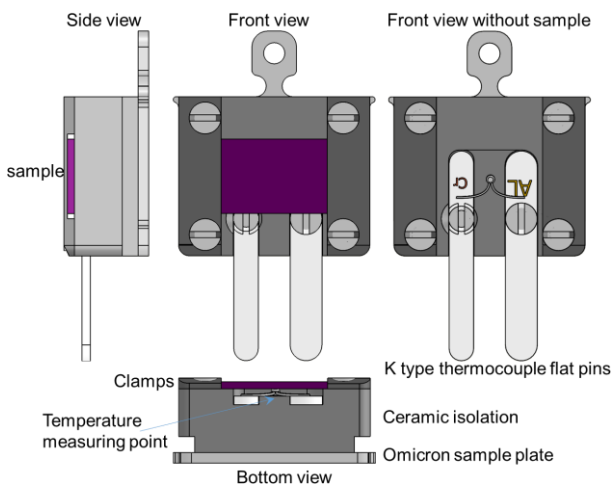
Schematic drawing of the sample holder with side, front and bottom views.
